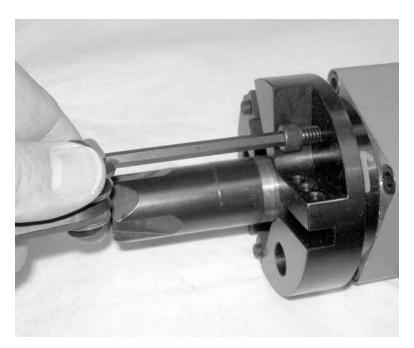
Install and tighten the 3 screws holding the tool head.
